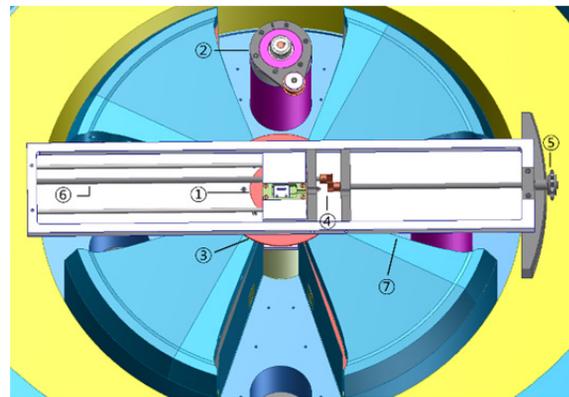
3D Model of Magnetic Field Measurement Instrumentation. ① : Step motor, ② : Hall Probe Sensor bracket, ③ : Rotation Plate, ④ : Spur Gear, ⑤ : Ratchet Gear, ⑥ : Linear Guide, ⑦ : Rotation jig.
